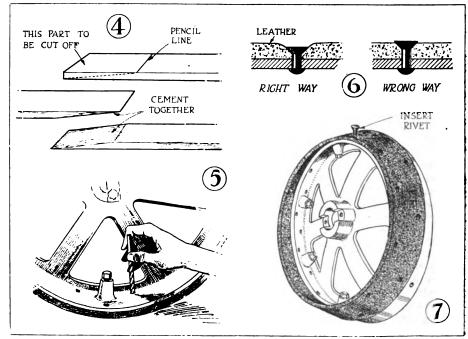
Beveling the edges of the facing. Fig. 5—Marking the facing to drill holes for the rivets. Fig. 6—Right and wrong way of riveting the facing. Fig. 7—Method employed to line up the rivet holes
